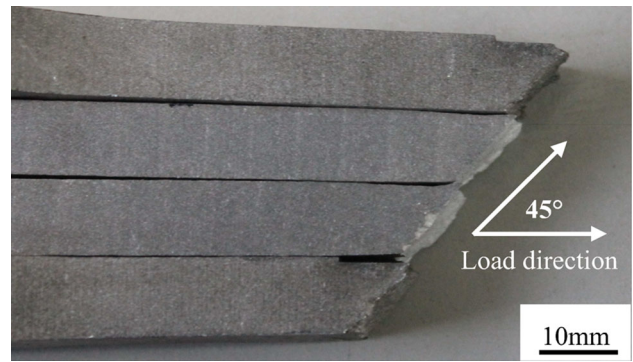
Fracture specimens of aluminum alloy 2219 after artificial aging and thermo-mechanical treatment
